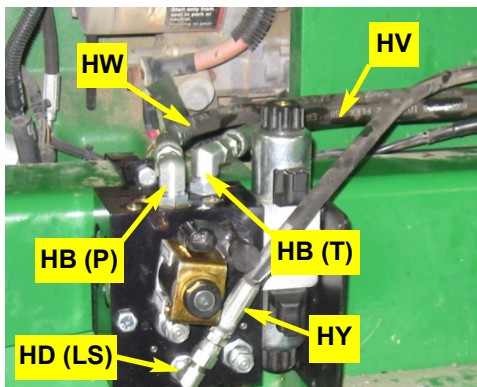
Pressure, tank and load sense hoses installed at steering block
